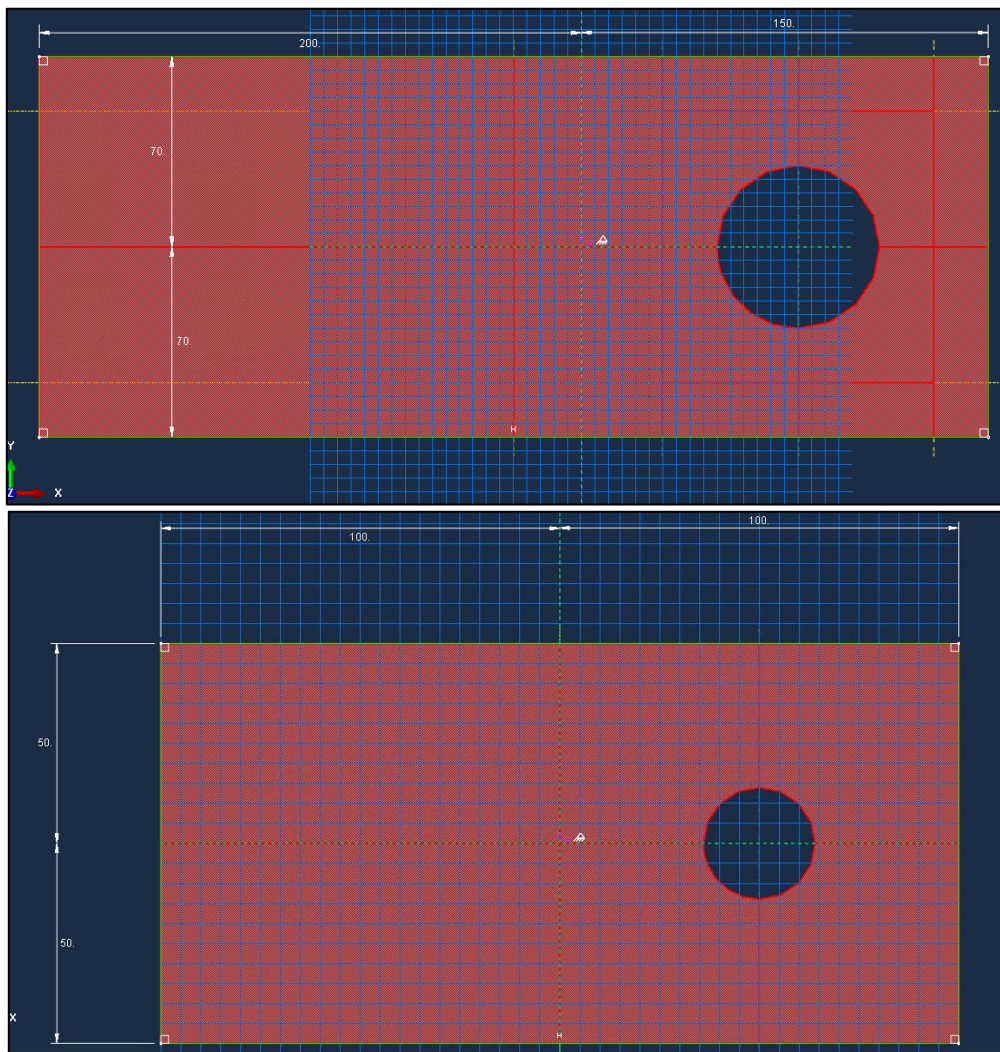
Top) Dimensions outer plates; Bottom) Dimensions central plate
